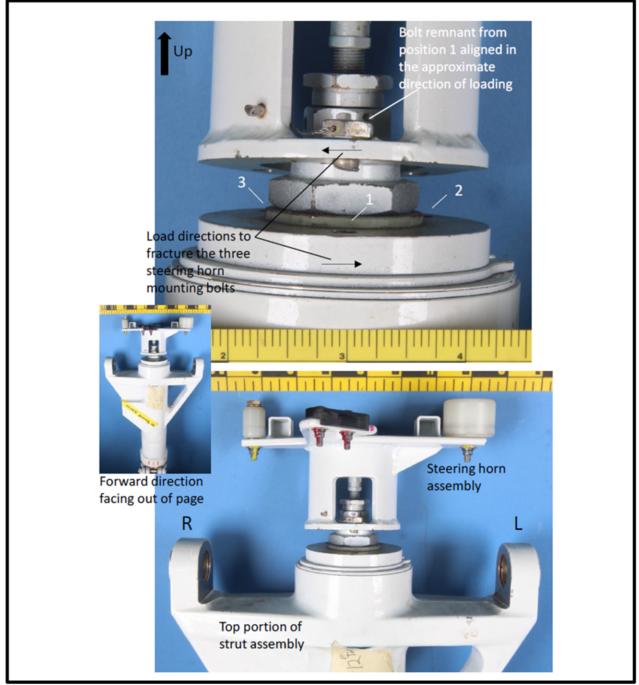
Photographs of the steering horn placed near the top of the strut on the NLG assembly.
